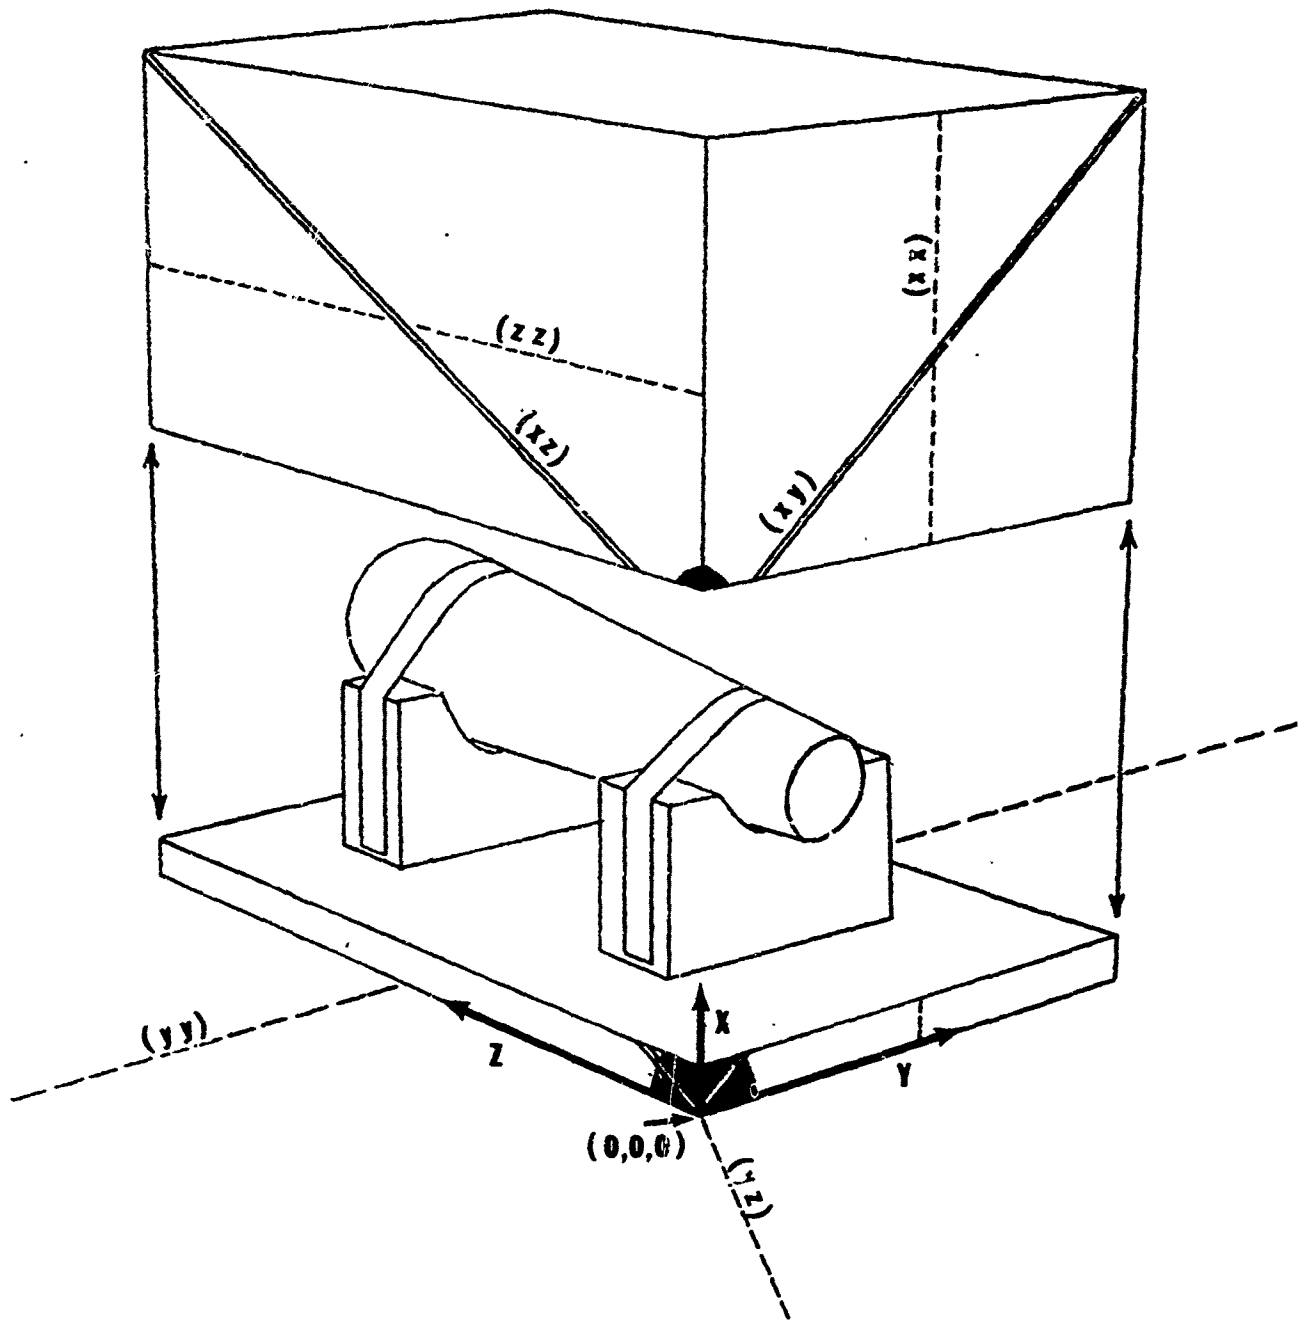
SPECIMEN HOLDER AND MEASUREMENT-AXIS SYSTEM. THE SIX SWING AXES ARE INDICATED WITH A TWO-LETTER DESIGNATION.
